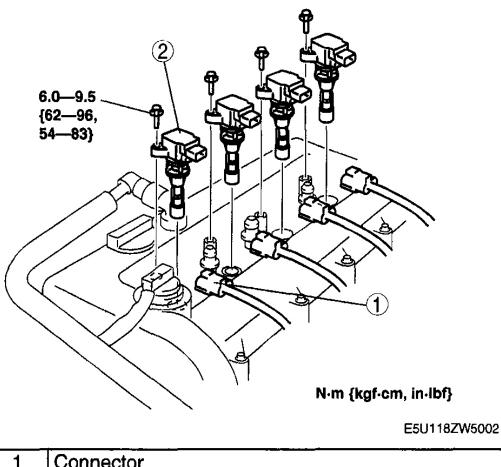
Identifying Location Of Ignition System Components Courtesy of MAZDA MOTORS CORP.
